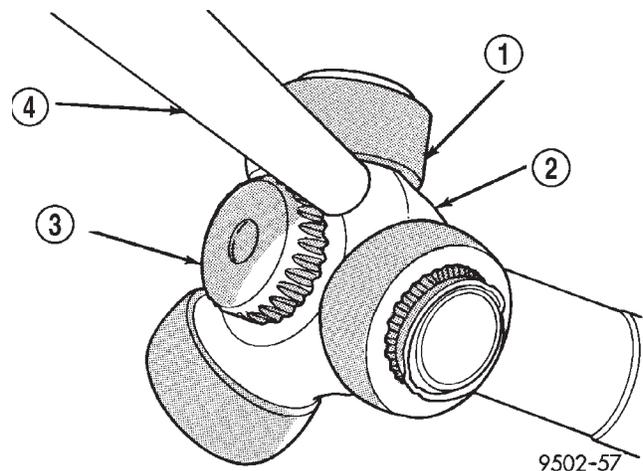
Installing Spider Assembly On Interconnecting Shaft
